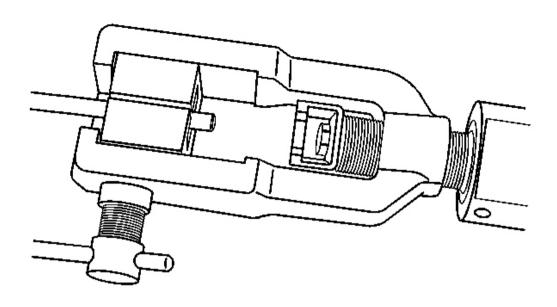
View Of Pipe Flaring Tool Courtesy of GENERAL MOTORS CORP.
